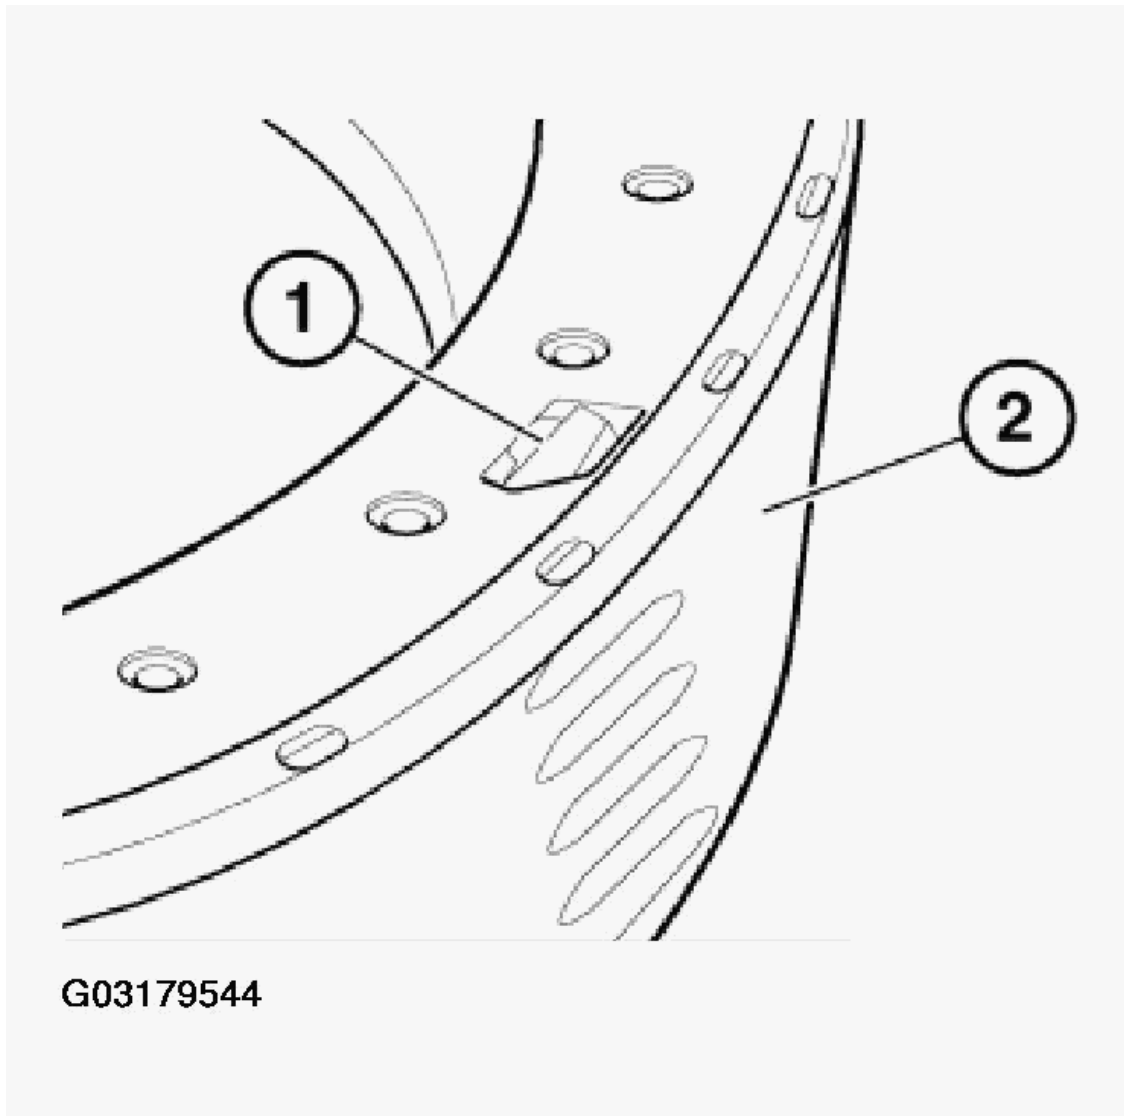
Identifying Wheel Electronic Unit And Support Ring
